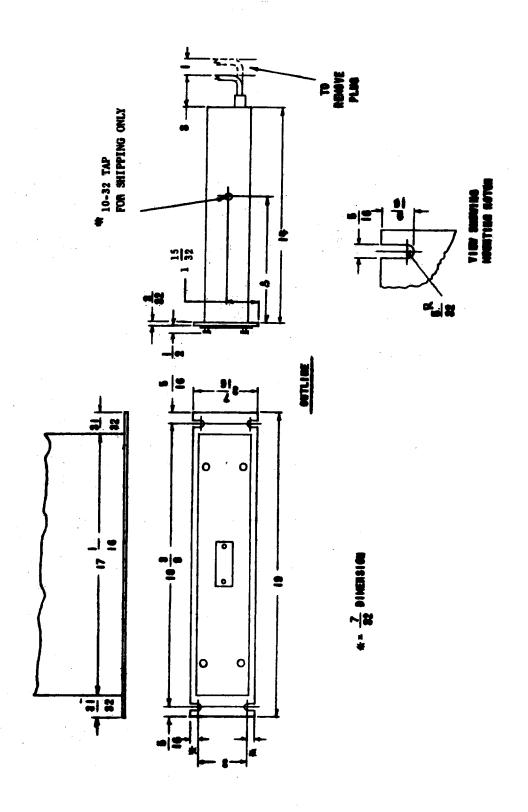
(0165A7660-5) OUTLINE AND MOUNTING DIMENSIONS FOR THE SLA12U RELAY
